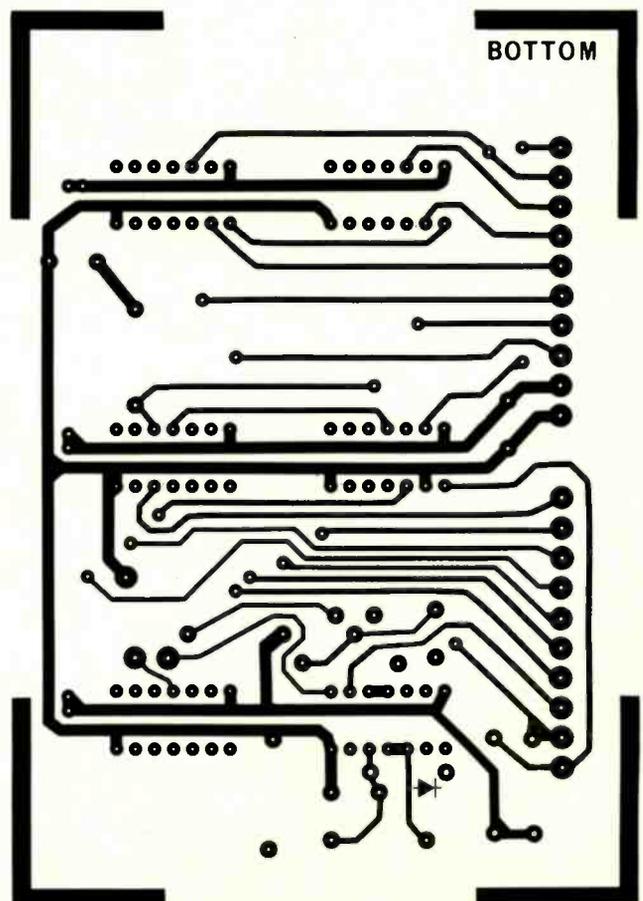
FOIL PATTERN for foil side of double-sided board shown full size.
